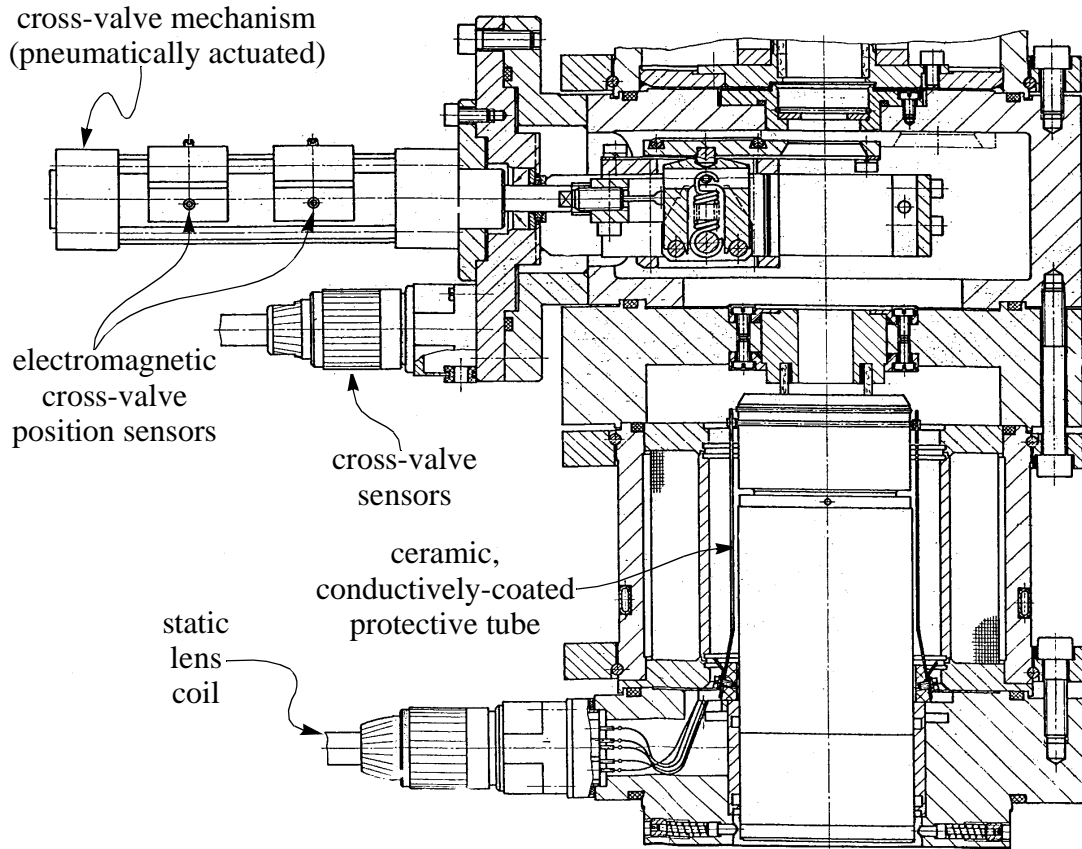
Beam Guidance System, center section of DVD e-beam gun.
